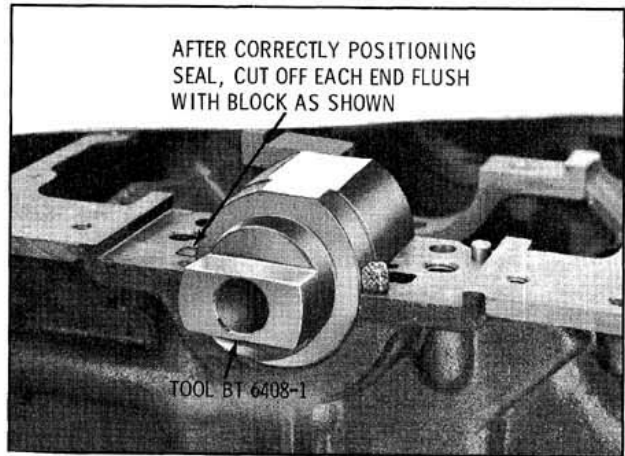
Installing Rear Main Oil Seal - Upper Half 330 Cubic Inch
